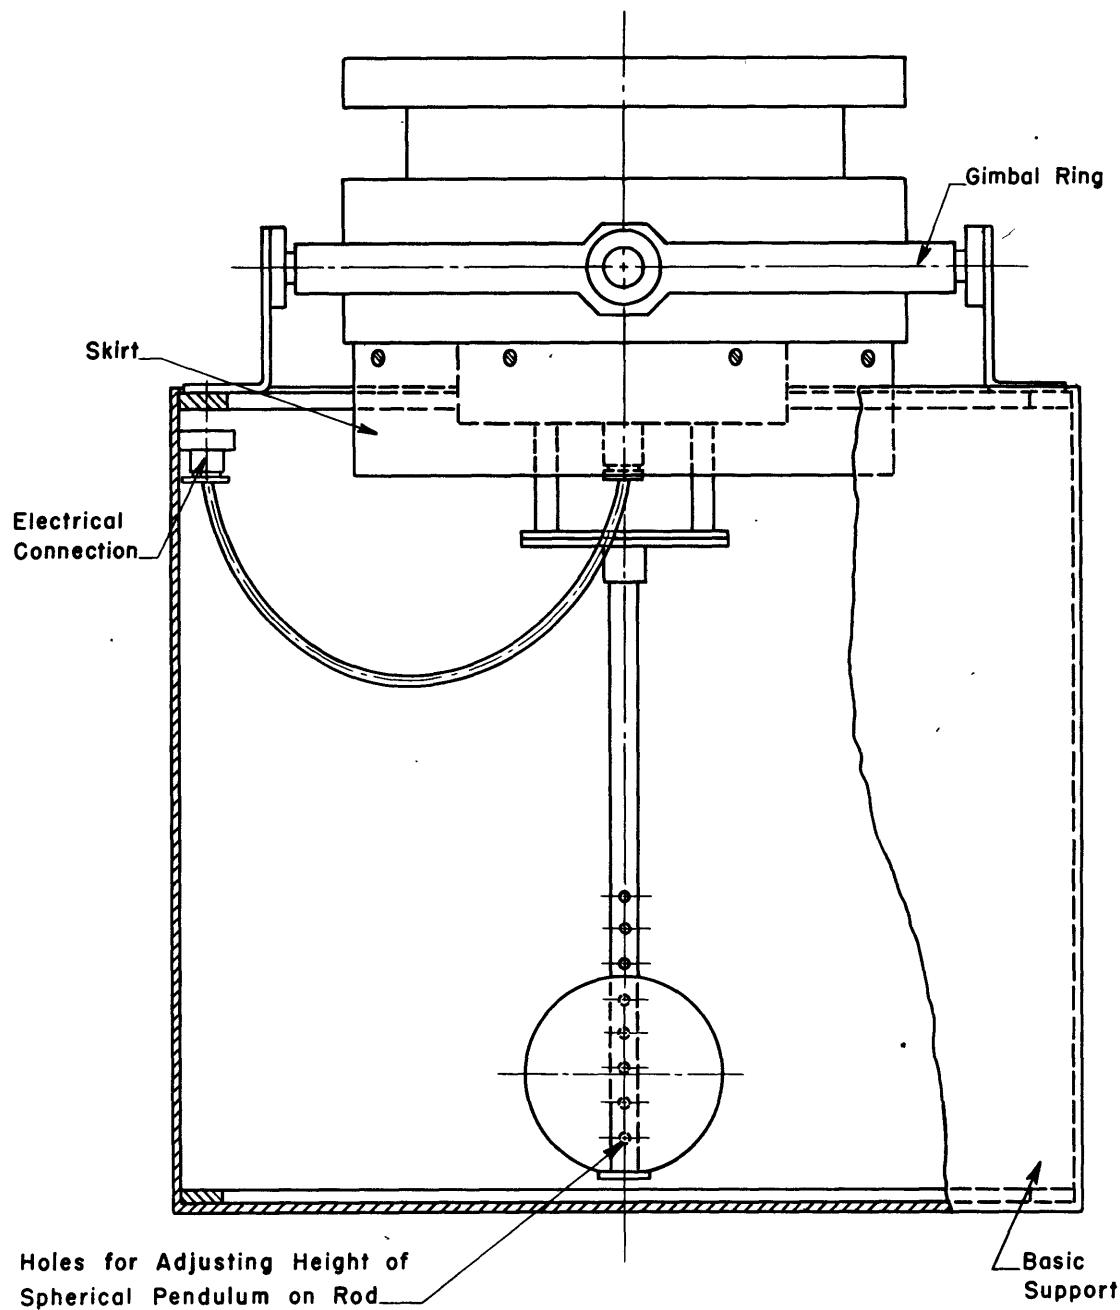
Sketch of Light Mounted on Basic Support and Showing Pendulum Attachment and Skirt in Place
